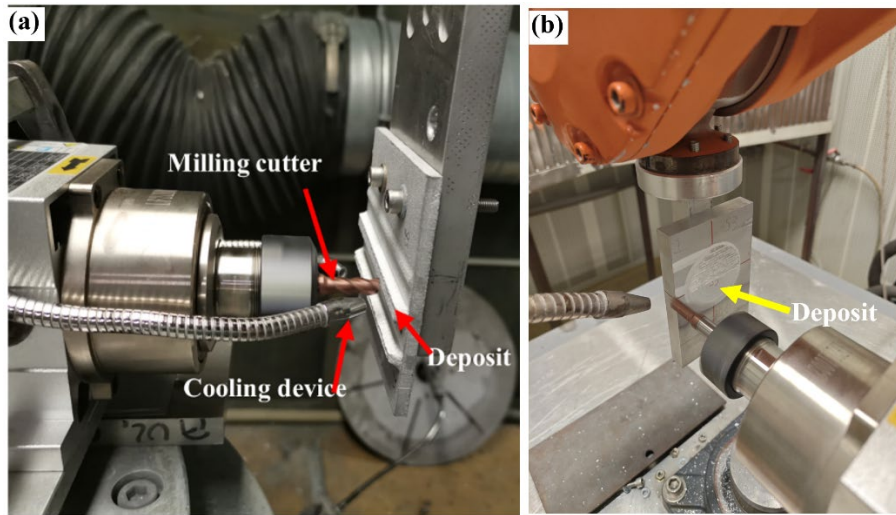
Subtractive module: (a) machining of the wall in the AM; (b) machining of the coating for as-repaired defect
